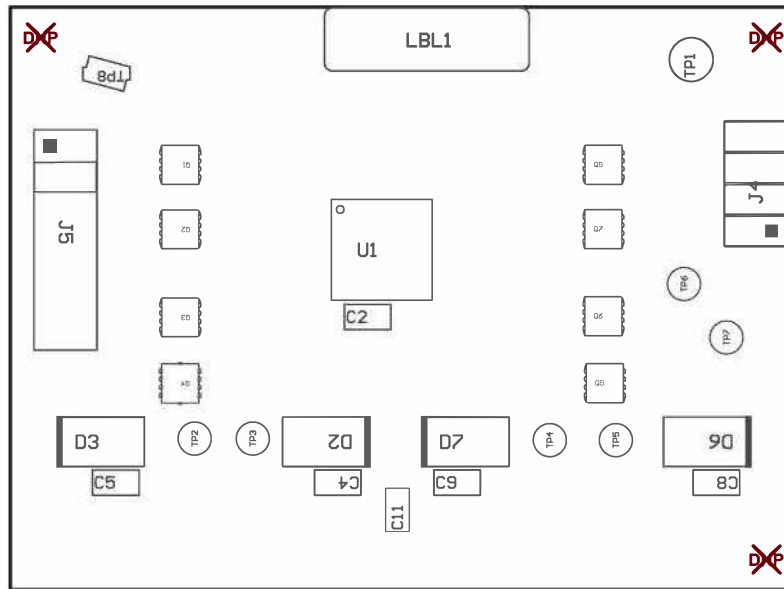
TPS23882B1EVM-008 (Daughterboard) Top Side Assembly
